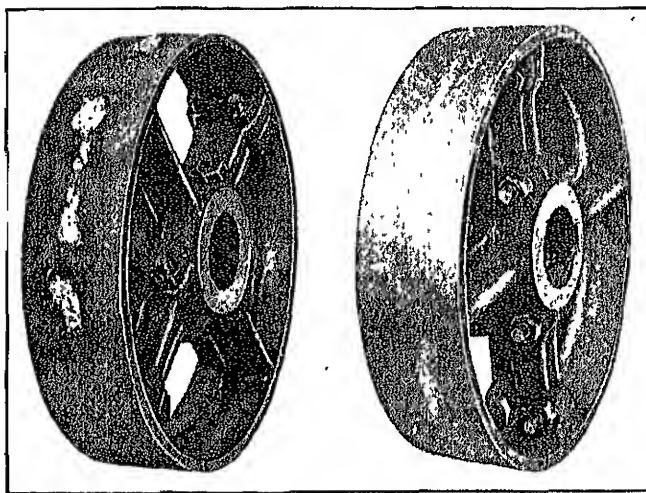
Welded Blowholes and Machined Pulley.
